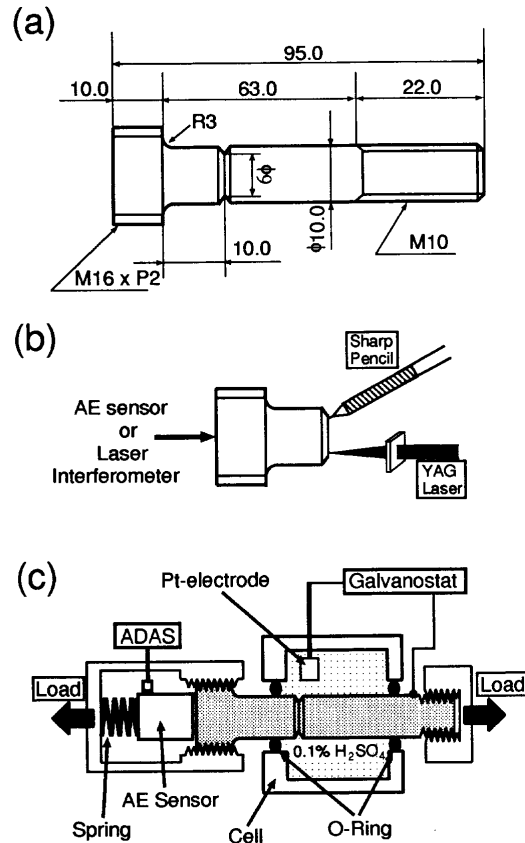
Specimen geometry (NACE TM0177) for delayed fracture test (a) and a method to determine the wave transfer function of specimen (b). (c) shows delayed fracture test.
